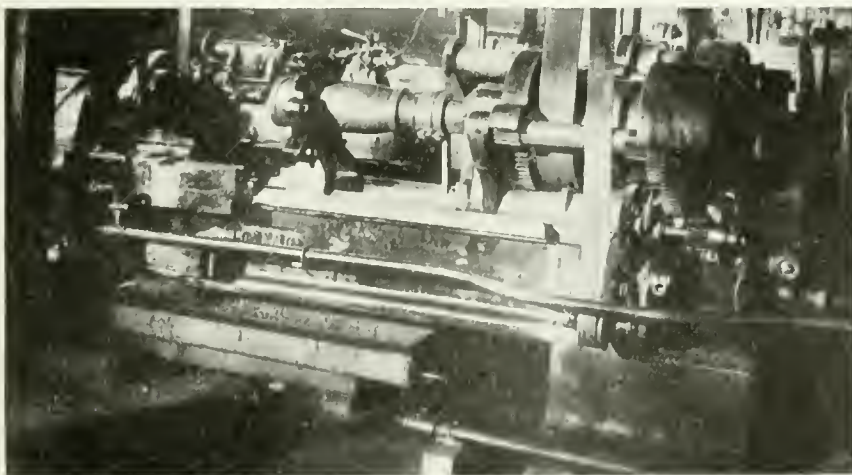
REAR VIEW OF BASE THREAD MILLING ATTACHMENT ON C.M.C. LATHE.
